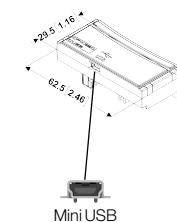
Accessory dimensions in mm [in] and connectors location
